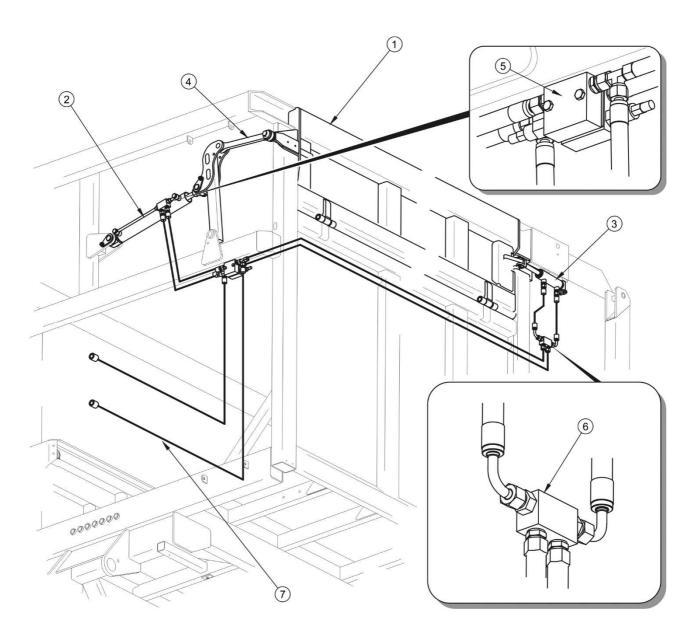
Design of the hydraulic system of the hinged wall
